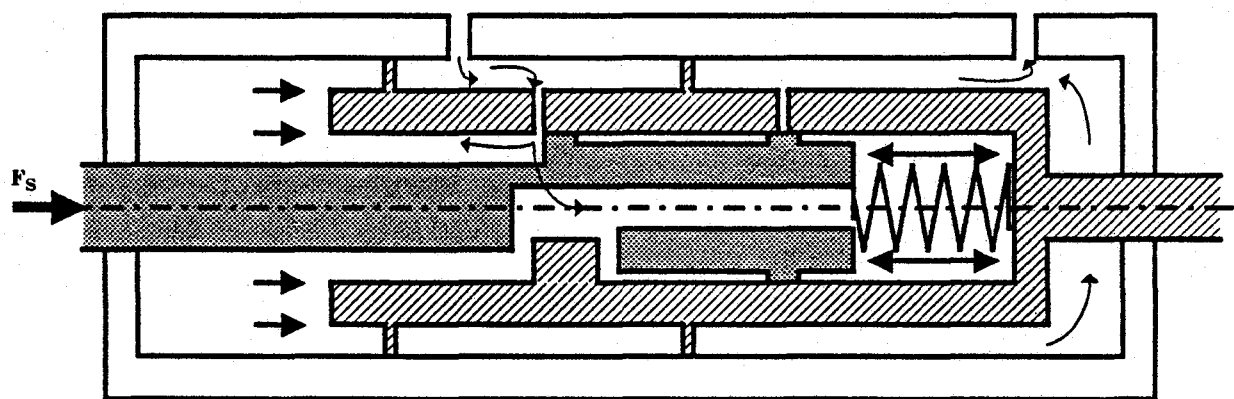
SPOOL VALVE DURING BRAKE RELEASE
